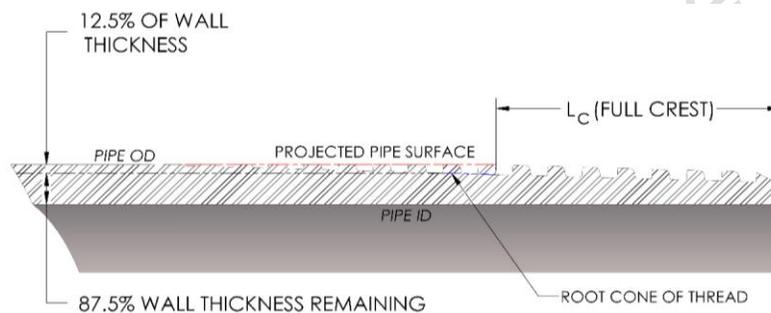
Vanishing Points and Full-Crested Thread Lengths
